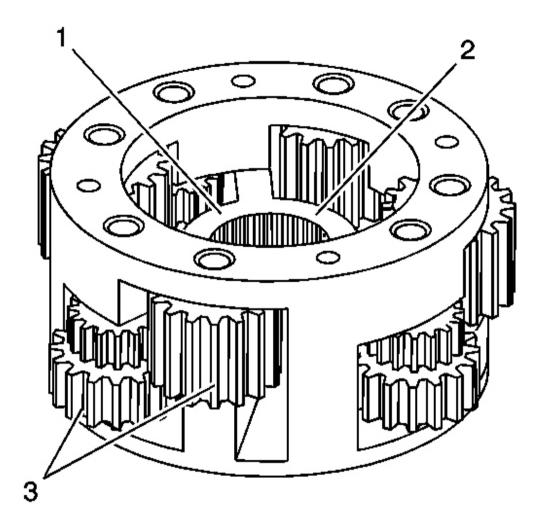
Inspecting Planetary Differential Courtesy of GENERAL MOTORS CORP.
